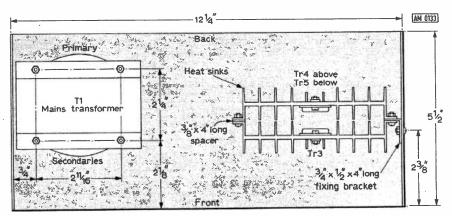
Plan view showing mounting details of mains transformer and power transistor heatsinks.
